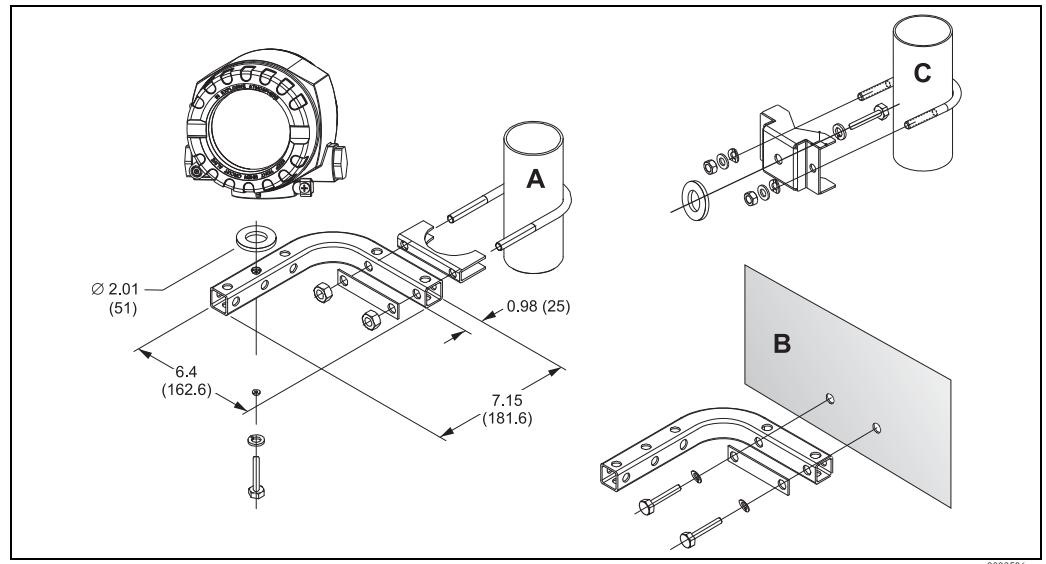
Installation of the field transmitter using the mounting kit, see chapter 'Accessories' (dimensions in in; mm)
